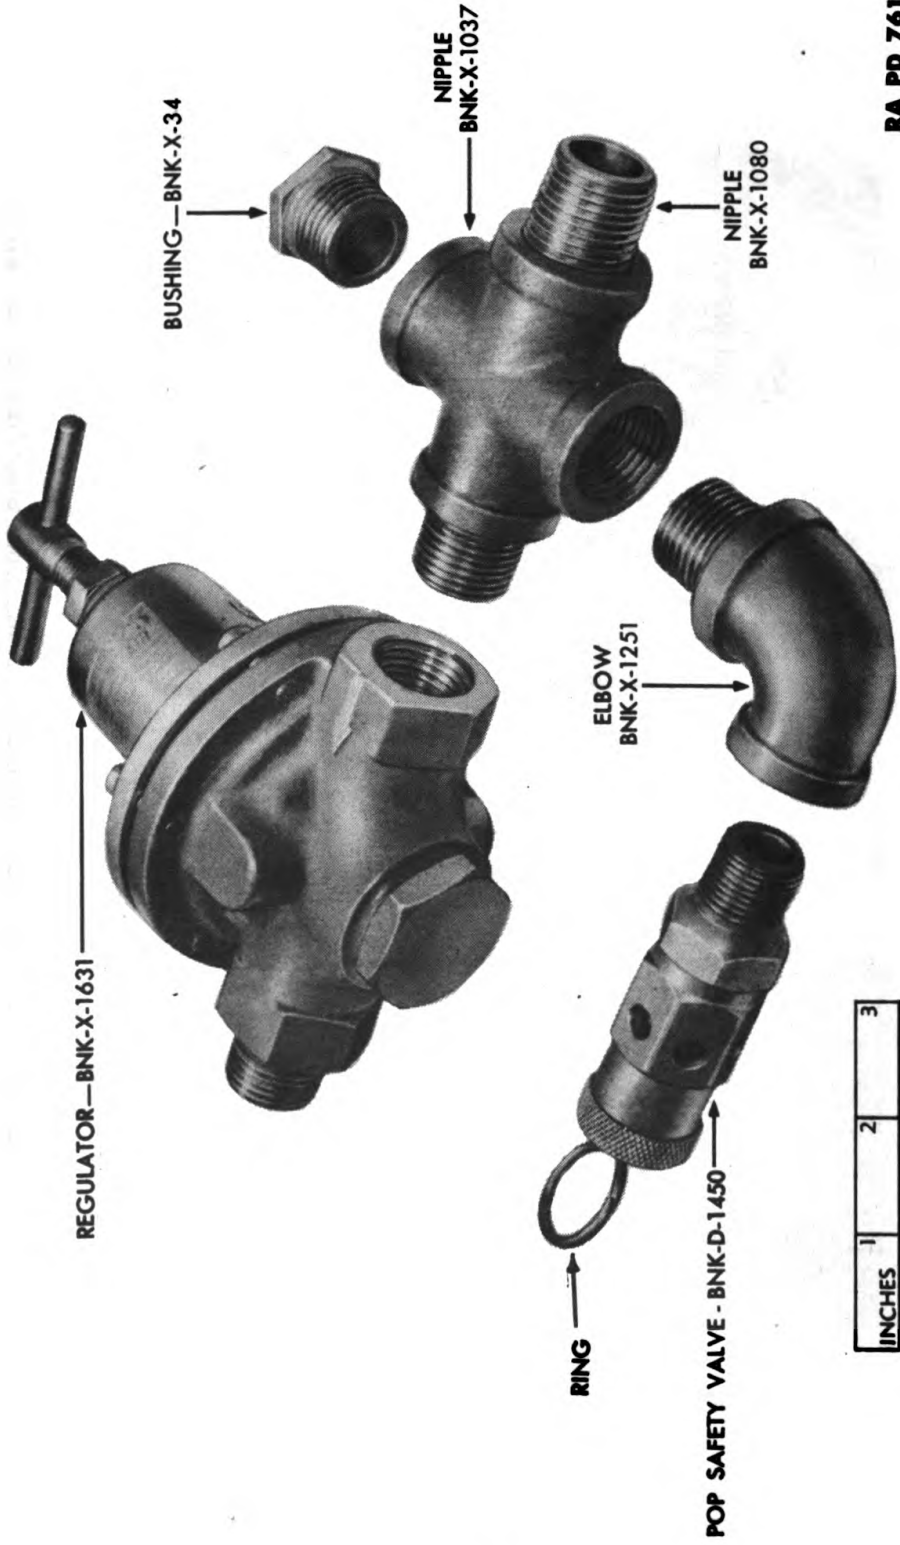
Pressure Regulator, Safety Valve, and Fittings for Air Compressor
